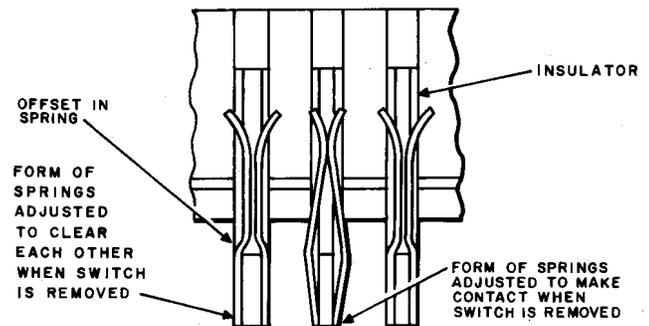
Method of Obtaining Clearance or Contact Between a Pair of Shelf Jack Springs
